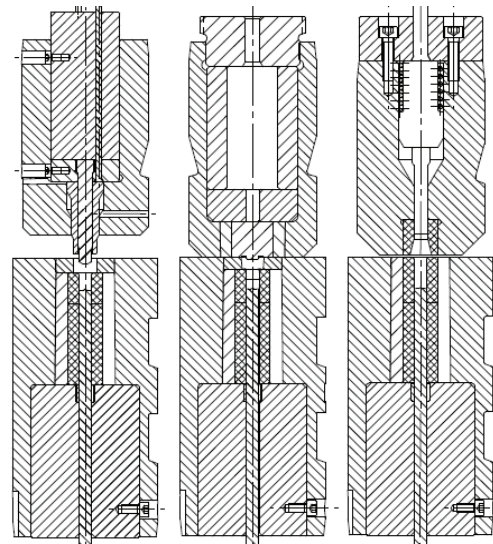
Setup of tools for forging of the screw M6x20 according to the standard ISO 4762.
